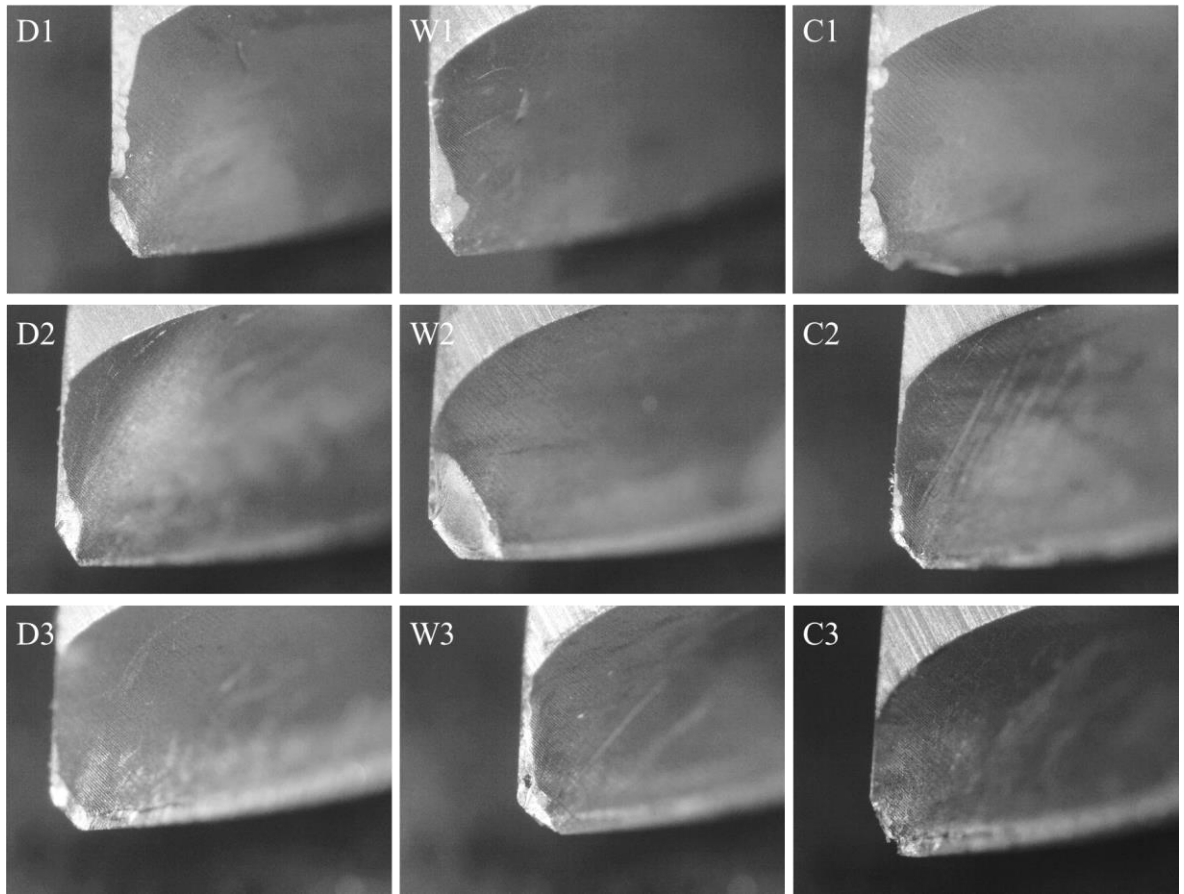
Flaking and crater wear on the tools used in machining experiments
